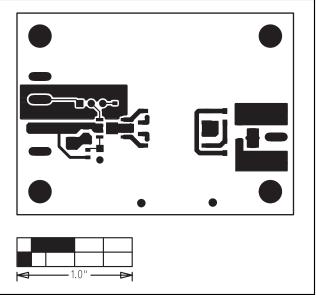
MAX256 EV Kit PCB Layout—Component Side
